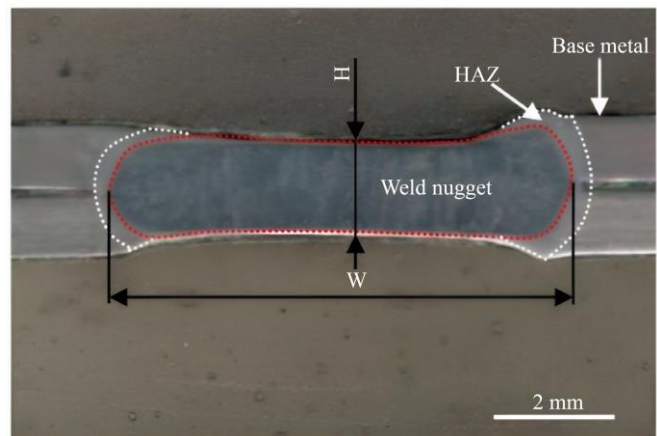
Cross section of spot welded joint in Ti6Al4V Ti alloy [60]
